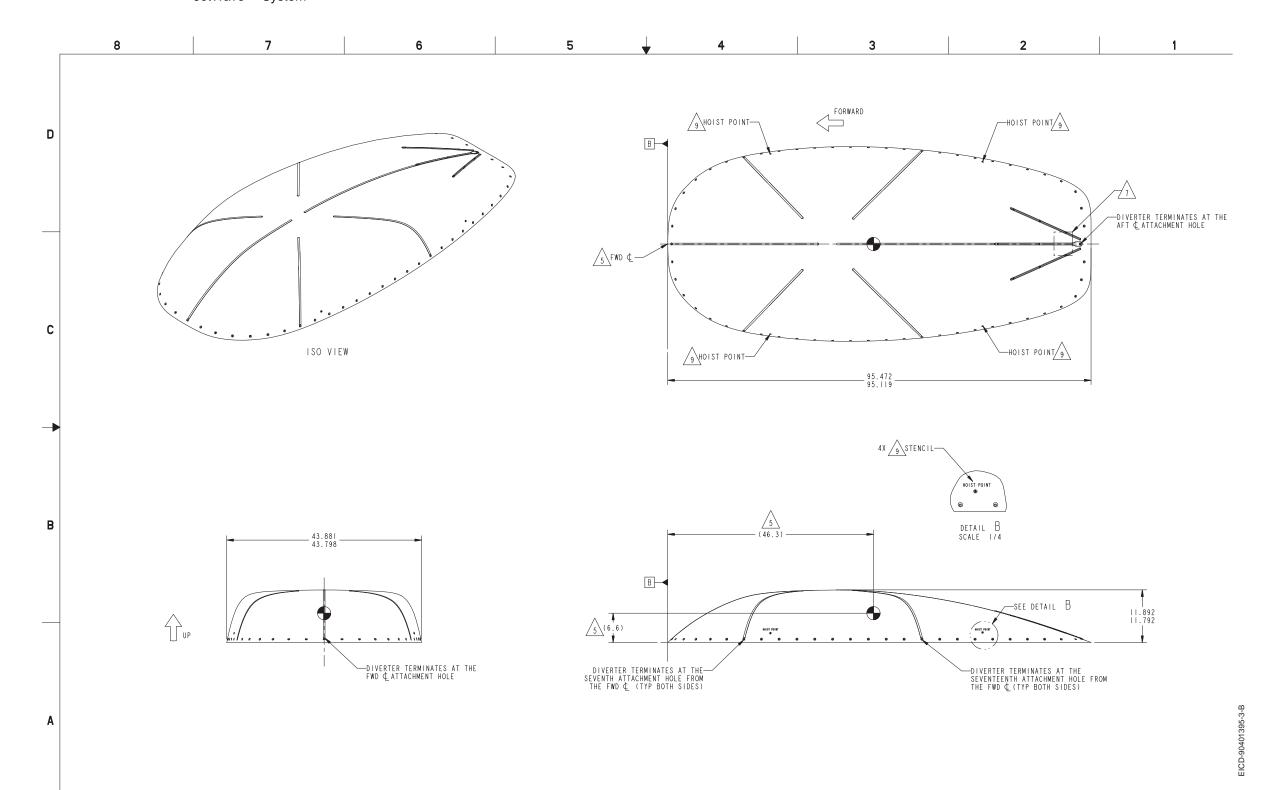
Fuselage Mount Radome Outline and Installation Drawing (Sheet 3 of 6)
